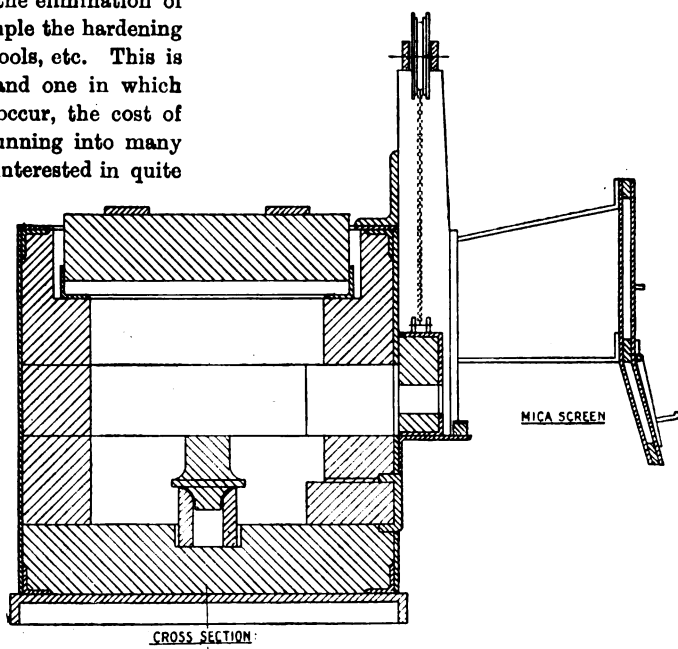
SECTIONAL VIEW OF "ROTOFLAM" TOOL-HARDENING FURNACE (Thompson's Patent).
